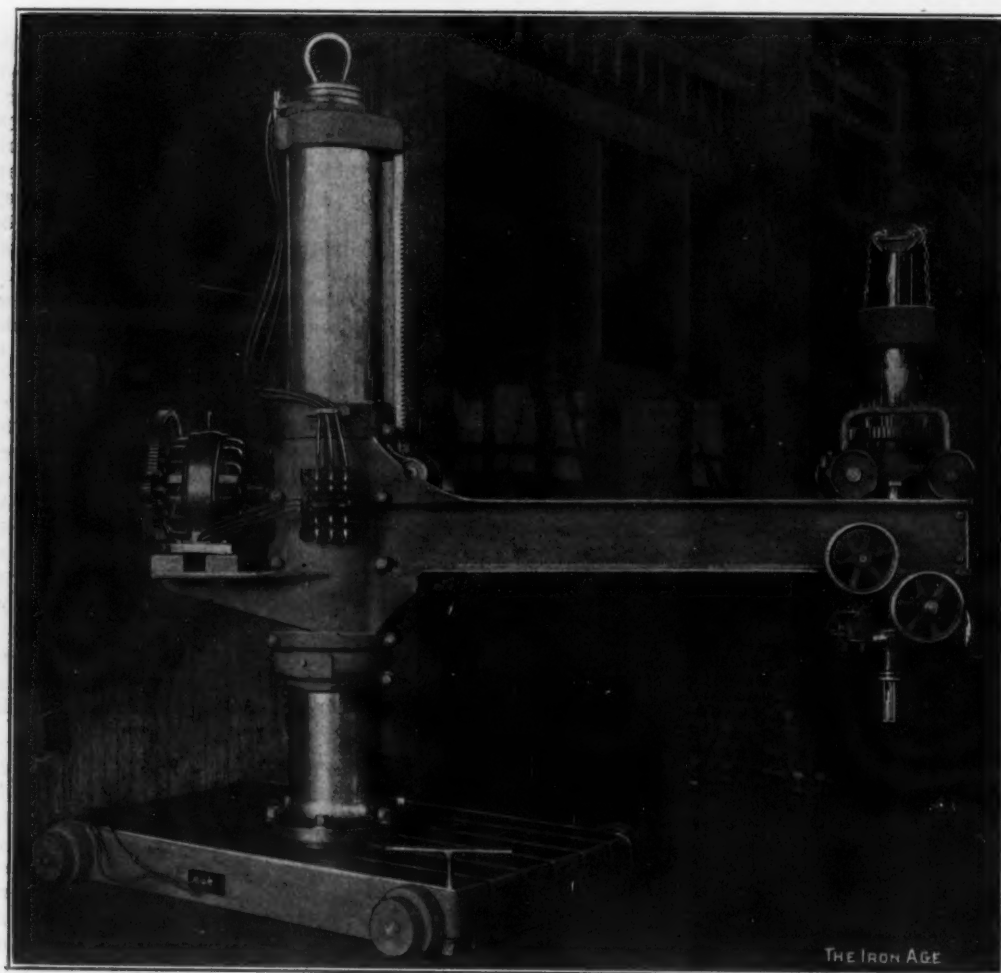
A Portable Radial Reamer Built by the Hanna Engineering Works, Chicago.
